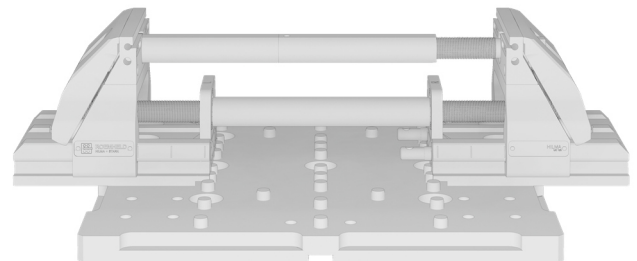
Clamping system with clamping range extension on 400x400 mm adapter plate
